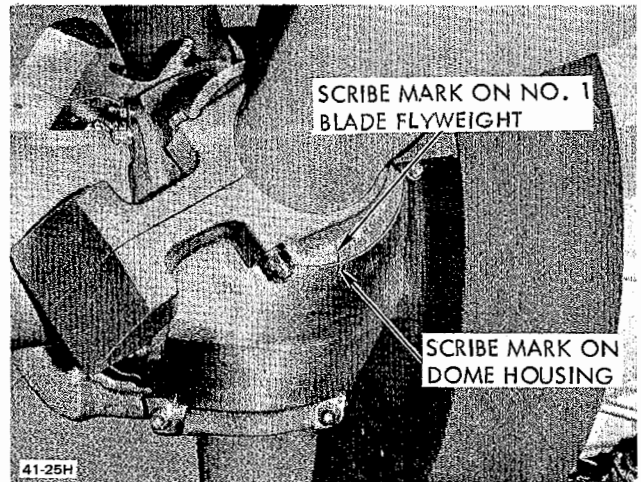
Propeller Installation and Blade Angle Adjustment (Sheet 2)
